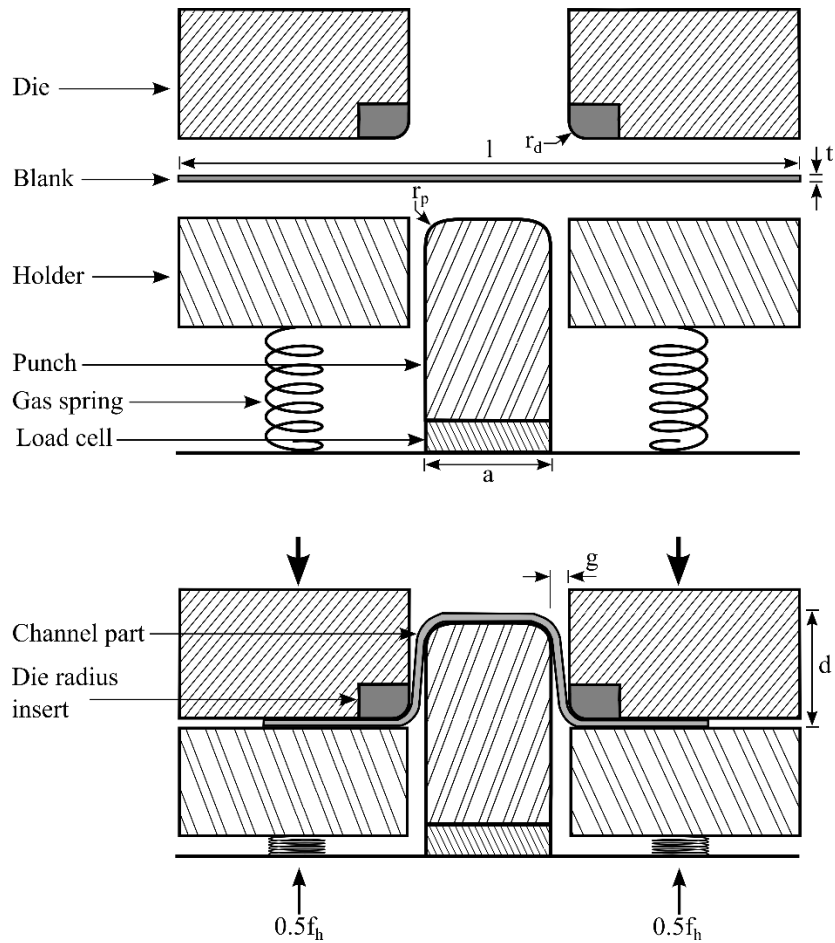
Semi-industrial stamping press channel forming operation schematic.
